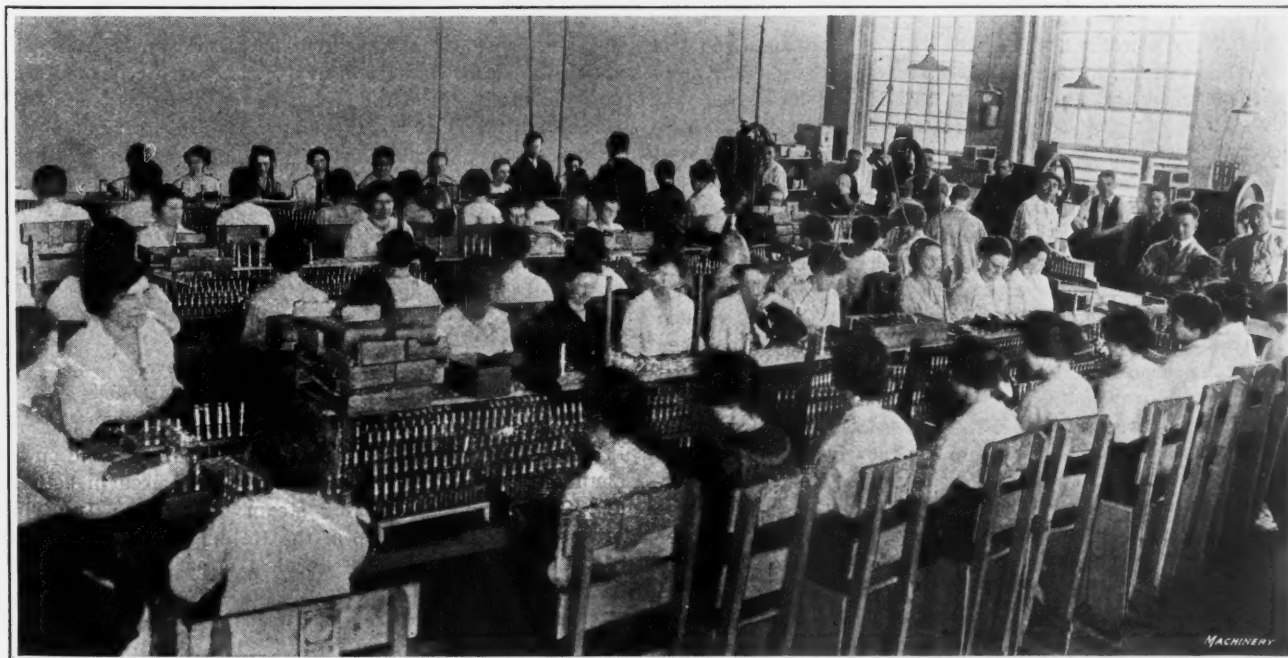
Government Inspection Department where Fuses are given Complete Inspection after they have been assembled and have passed Final Visual Inspection
